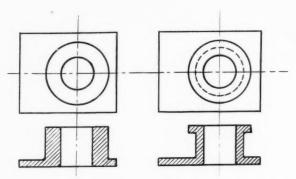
Flange body of varying (left) and uniform (right) sections, both offering same bolting surface
